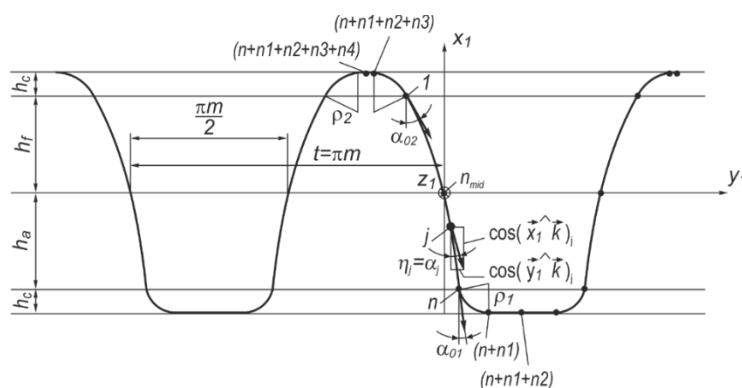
The initial producing contour of a rack tool for the machining of non-involute gear wheels
